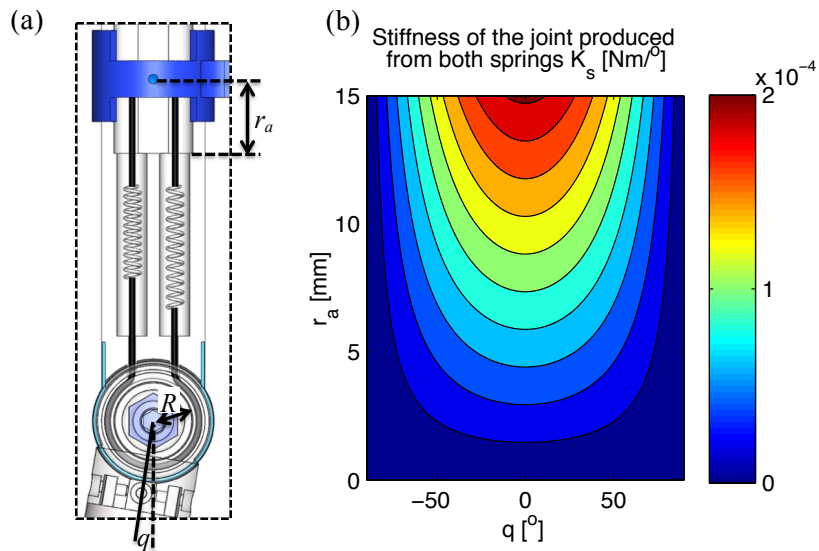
(a) The exploded view of the McKibben type joint mechanism with two springs located inside the base link. Both springs are attached to the common point at the middle of the pivot joint through a microfilament thread. The other ends of both springs were attached to the anchor ring. The displacement of the anchor ring from the resting position, r_a , was used to control the stiffness of the joint. (b) The analytical stiffness rating of the joint as the angular displacement of the pivot changes between -90° and 90° across the variation of the anchor ring's position.
